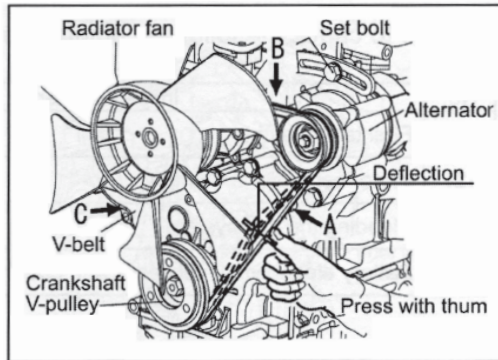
Alternator Drive Belt (V-belt) Adjustment
